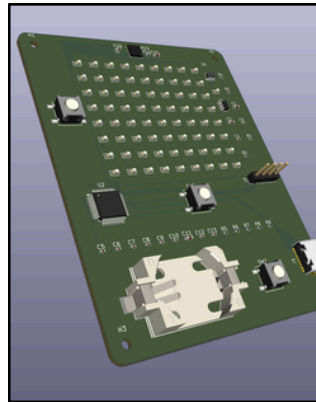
PCB Routing on KiCAD: The final 3D board layout with switch placements, 2-layer design, and coin cell charging section
